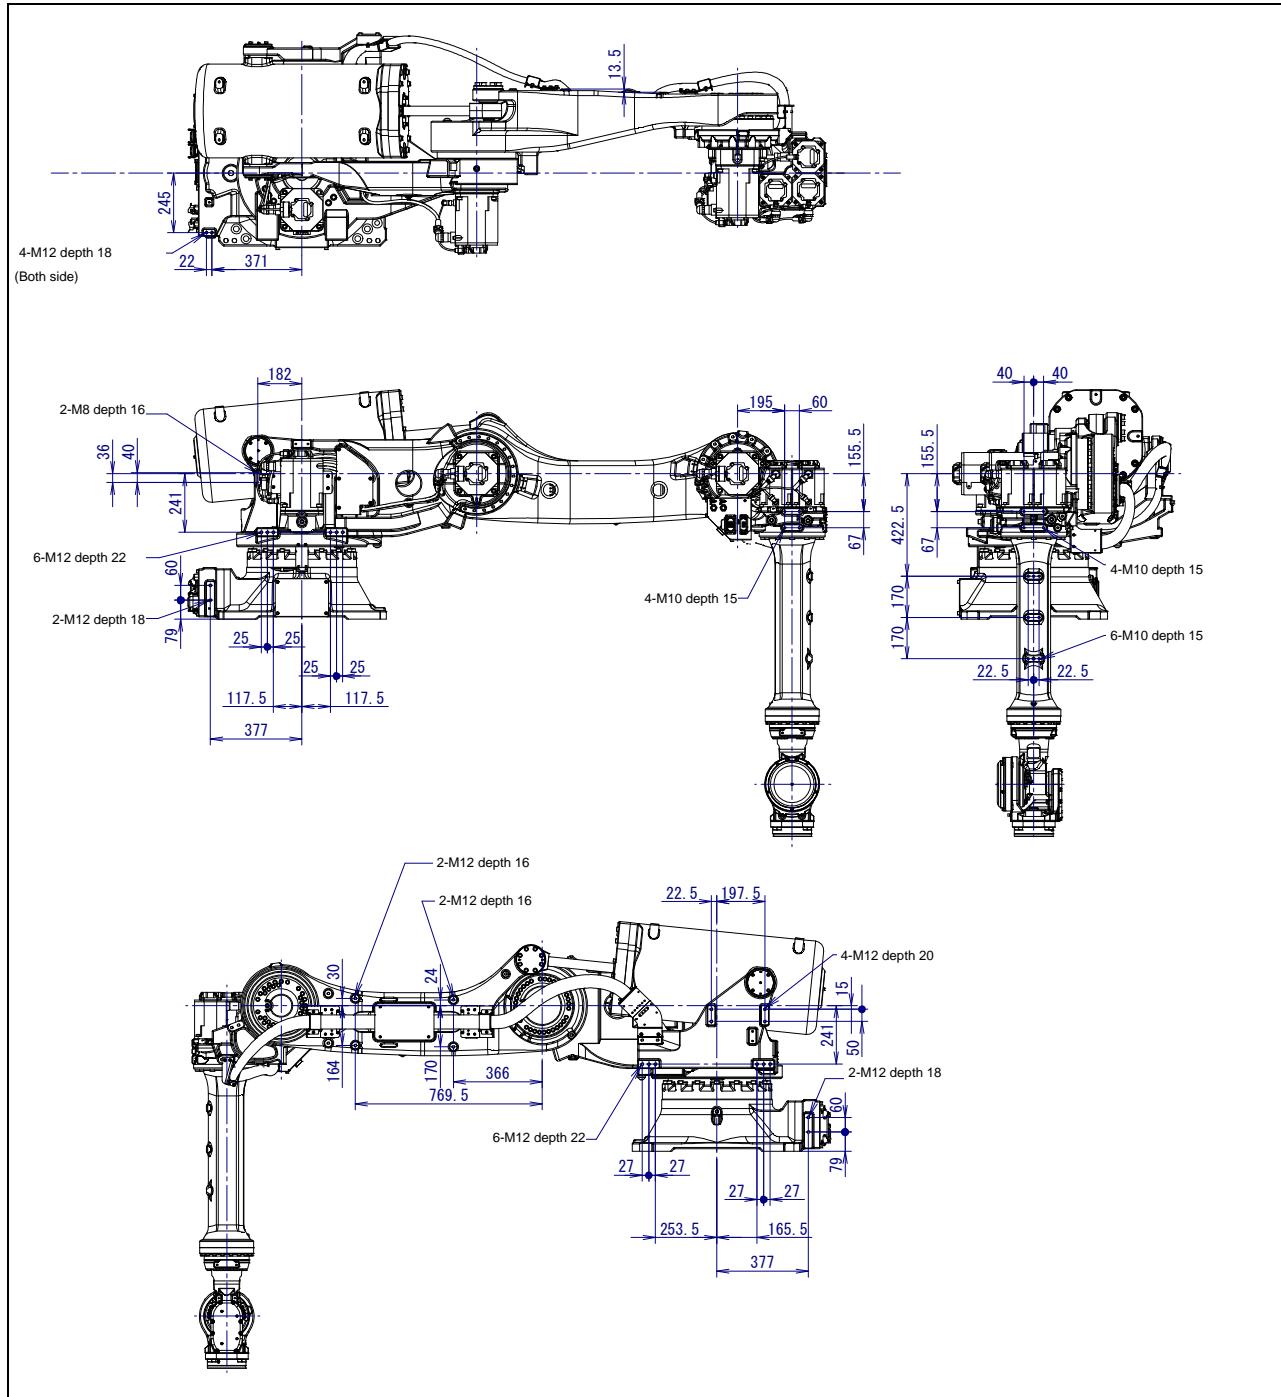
(b) Equipment mounting faces (R-2000iC/125L)
